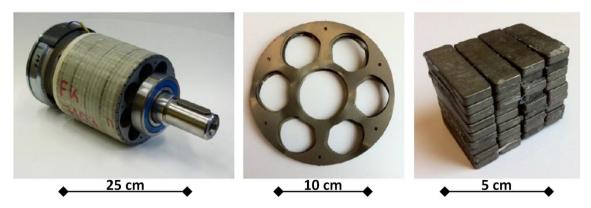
Rotor, rotor segment, and dismantled magnets (left to right) of a SPM rotor [52]
